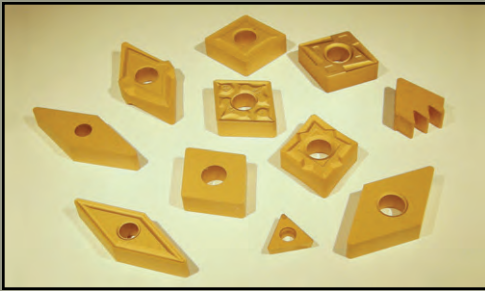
Image showing examples of turning inserts coated with the new cBN coating.
